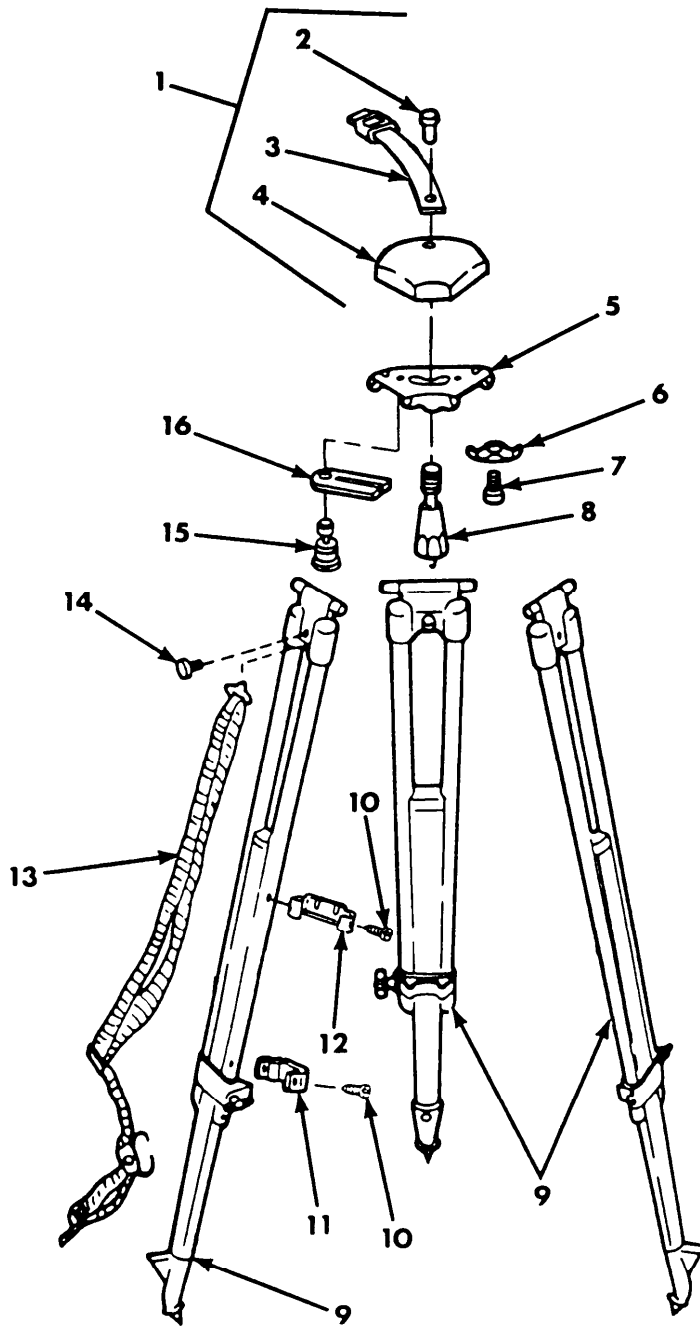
Tripod, Aiming Circle, M24 8242777 and Cover Assembly 8216550.
